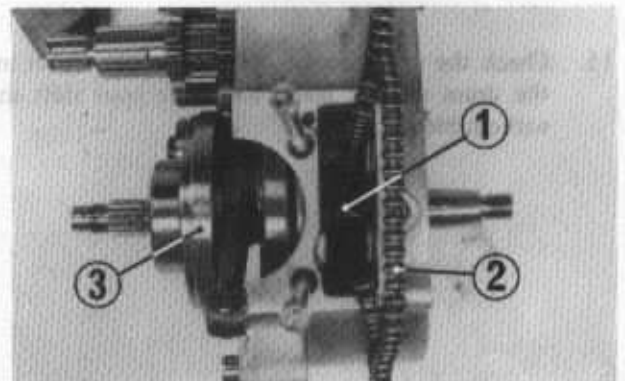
(1) Timing sprocket (2) Cam chain (3) Crankshaft
